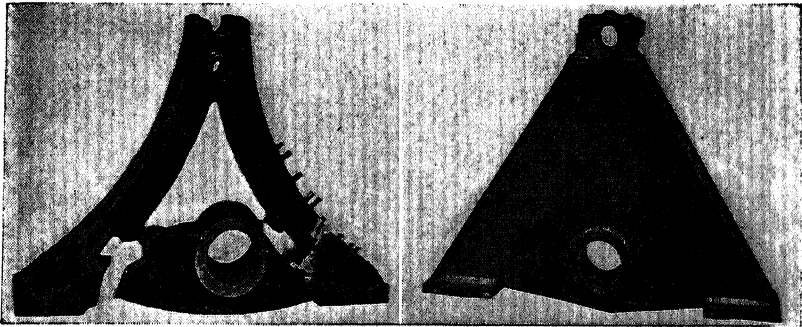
Broken bearing support for set of rolls (left) replaced with part shown at right, using welded construction with $\frac{3}{4}$ " mild steel plate. Saving 32% over replacement cost.
